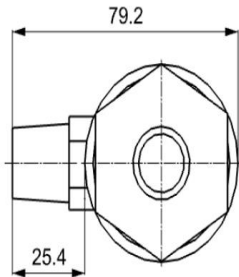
Cold End Side View, Where The Cold Air Comes Out And The Intake Section
